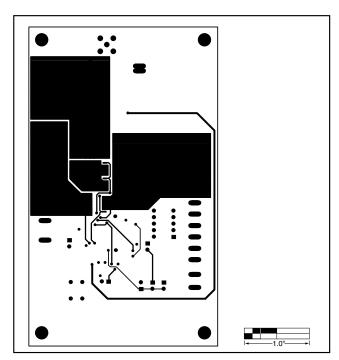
MAX1855 EV Kit PC Board Layout—Solder Side
